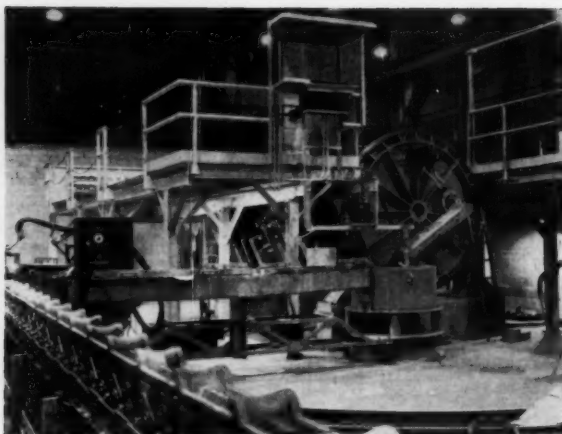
Large Tama-Wyatt furnace set up for continuous casting of ingots. Easy cleaning is possible.
